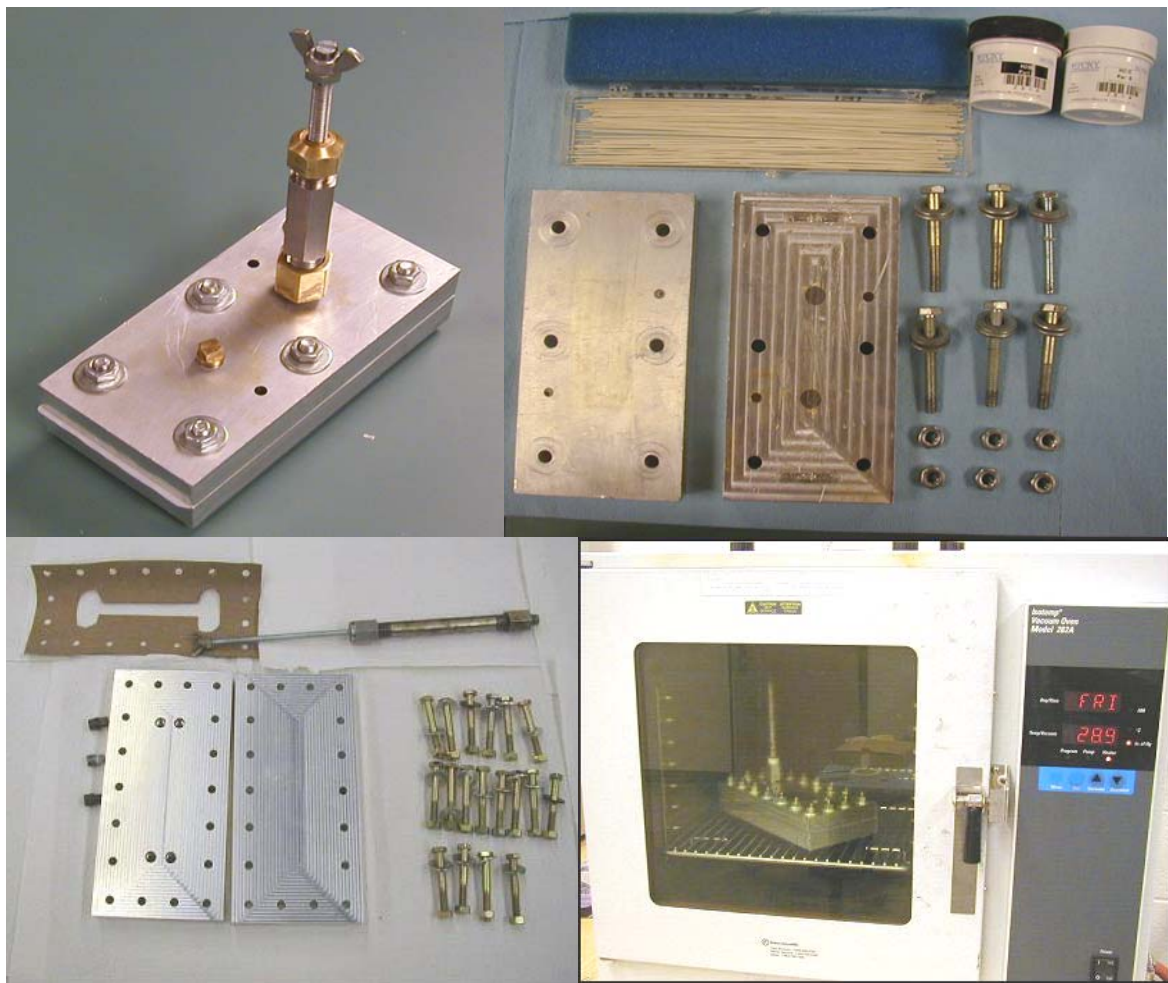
Mold for casting AFCS showing original and updated design and curing in an oven.
